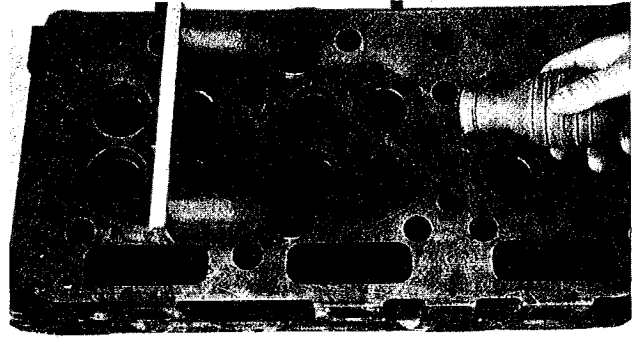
Place tool as shown above. Repeat procedure as outlined in Figure 1. You are now checking for cracks running lengthwise of the cylinder head.
